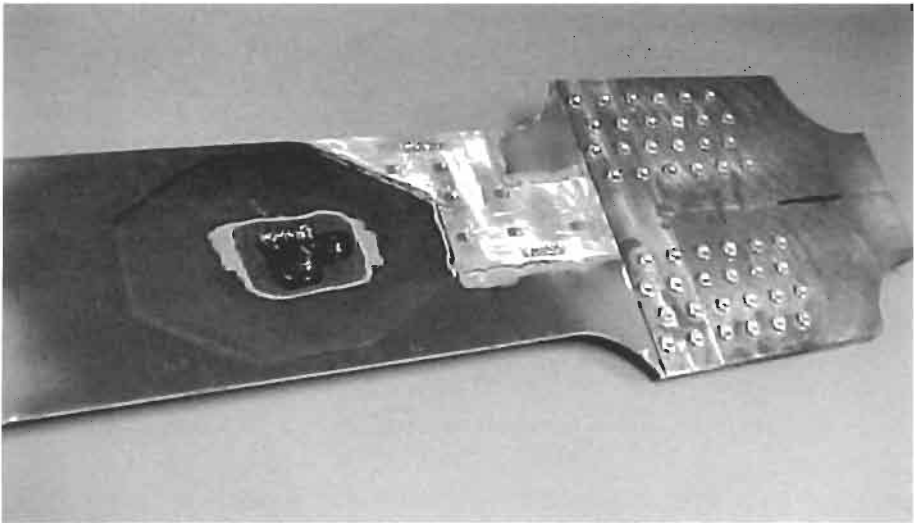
Static and fatigue test specimen made from a C-141 wing plank with three doubler bonded composite repair.
